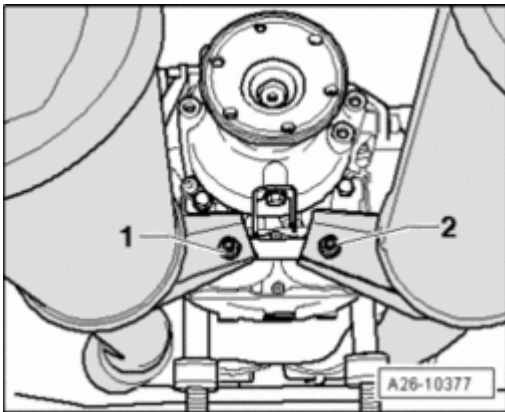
Removing Bolt On Bracket For Exhaust Pipe & Heat Shield
